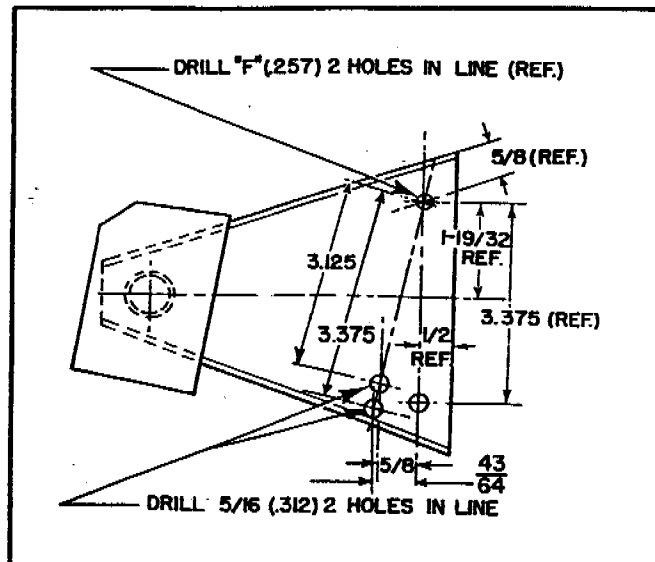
B - View Showing Location of Additional Hole to Be Drilled in the Elevator Inertia Weight Assembly for Use on P-51B, P-51C, and F-6C Airplanes if Lower Hole in Bell Crank Has Been Drilled 3-3/8 Inches From Upper Hole
